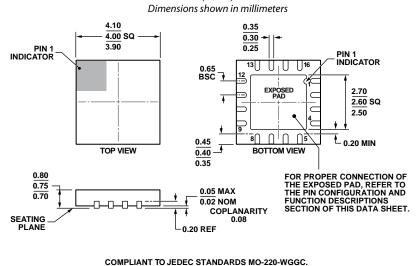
16-Lead Lead Frame Chip Scale Package [LFCSP] 4 mm × 4 mm Body and 0.75 mm Package Height (CP-16-17) Dimensions shown in millimeters
